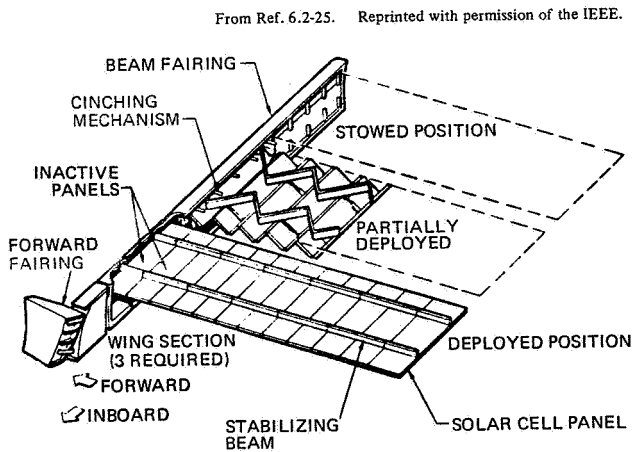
OWS Solar Cell Array Wing Assembly (Ref. 6.2-25)
